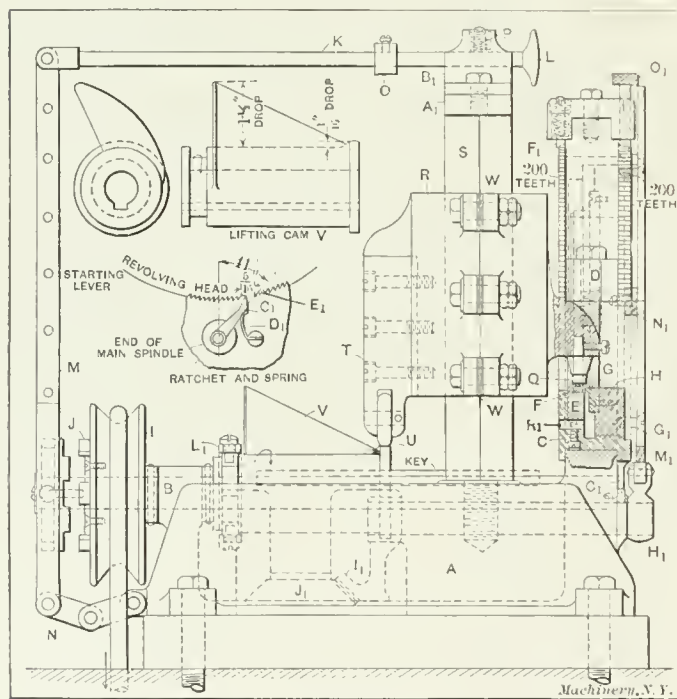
Side Elevation of Automatic Piston-ring Peening Machine
